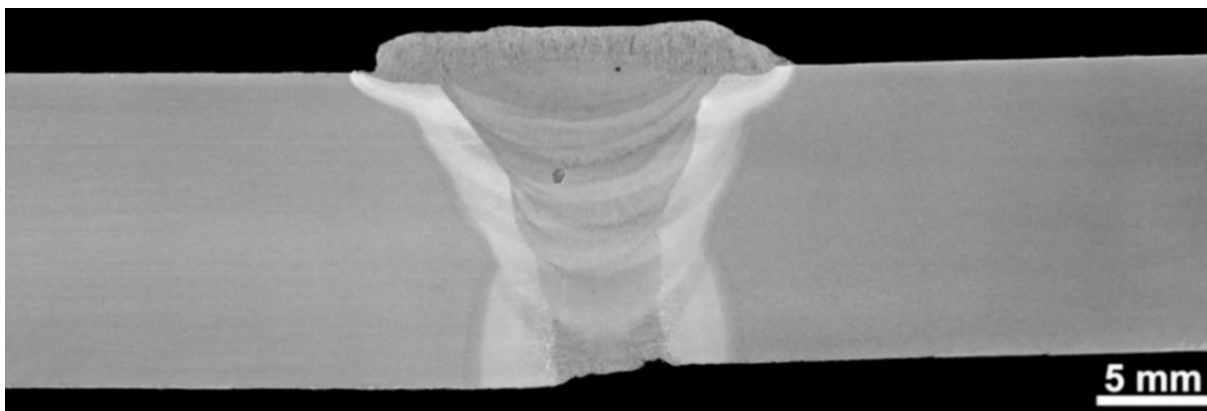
Macrograph of the Structures Present in the Girth Weld of the X60A steel pipe.
